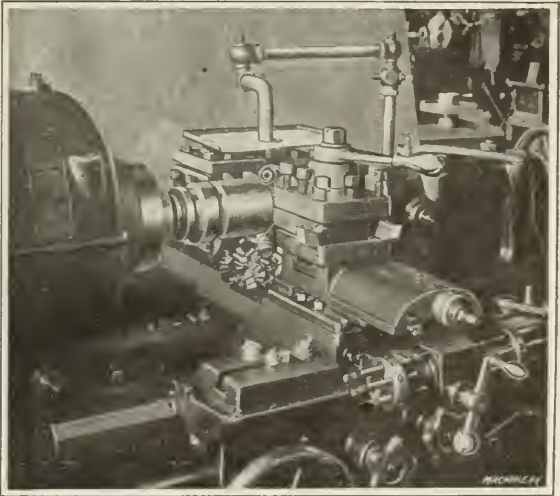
Turning Double Bevel Pinions in Selective-head Lathe
